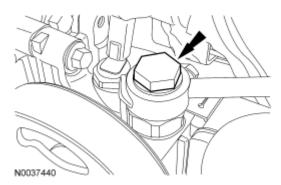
Locating Power Steering Pressure (PSP) Tube Bolt Courtesy of FORD MOTOR CO.
